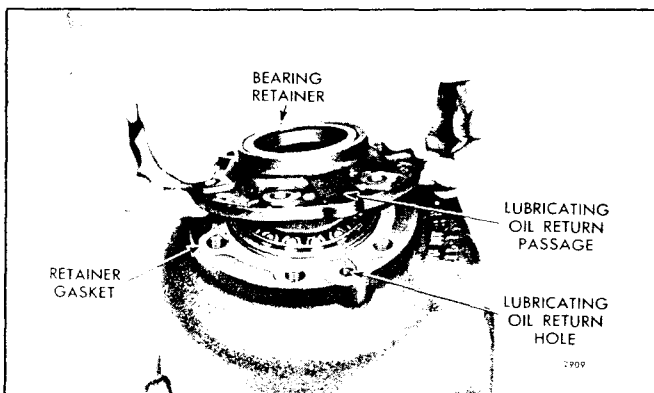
Installing Drive Shaft Bearing Retainer on Gear Housing
